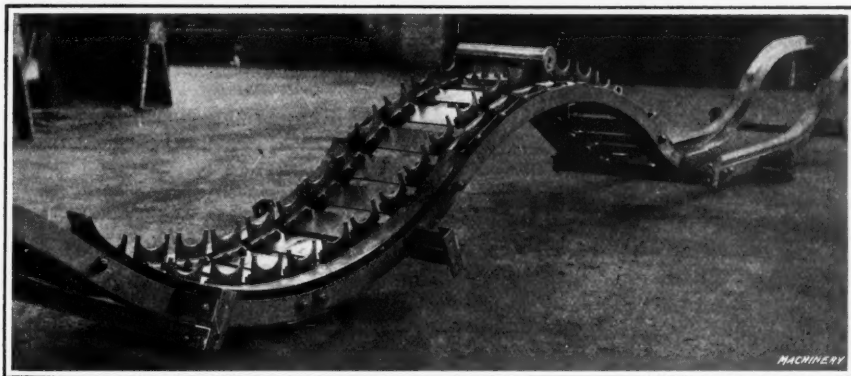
Chain Belt Conveyor for carrying Shells through Pickling Bath
